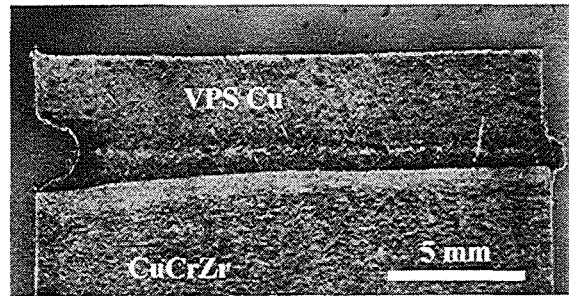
Micrograph showing the electron beam weld used to join VPS Cu to CuCrZr. Penetration depth is 19mm. Beam direction is from left to right.
